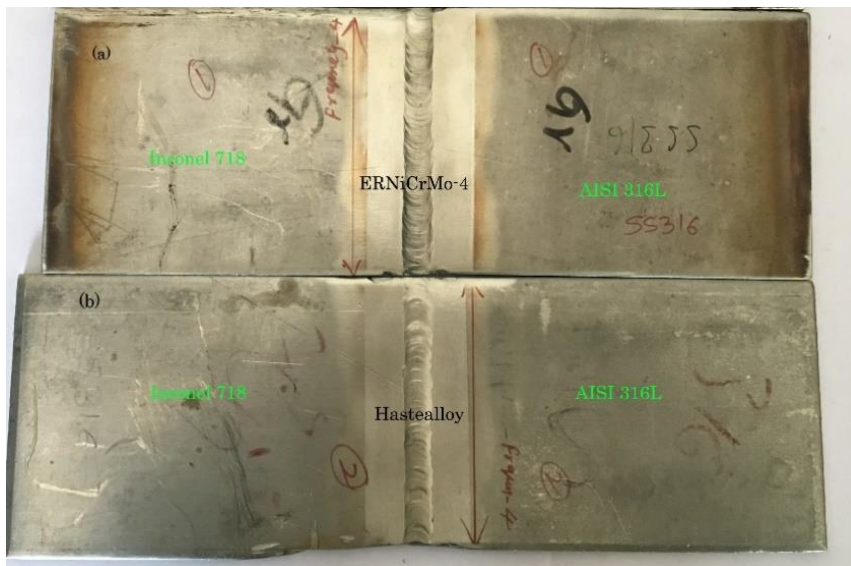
Developed dissimilar weldments (a) ERNiCrMo-4 and (b) Hastealloy fillers.
